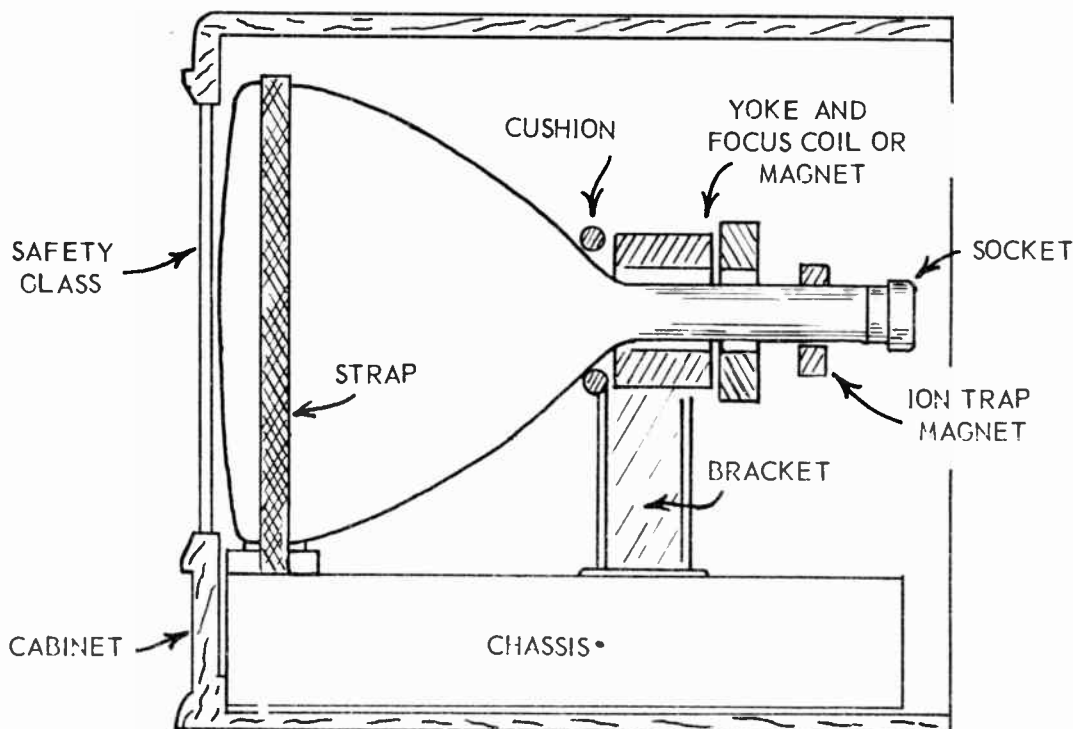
A picture tube mounted on and wholly supported by the chassis.
